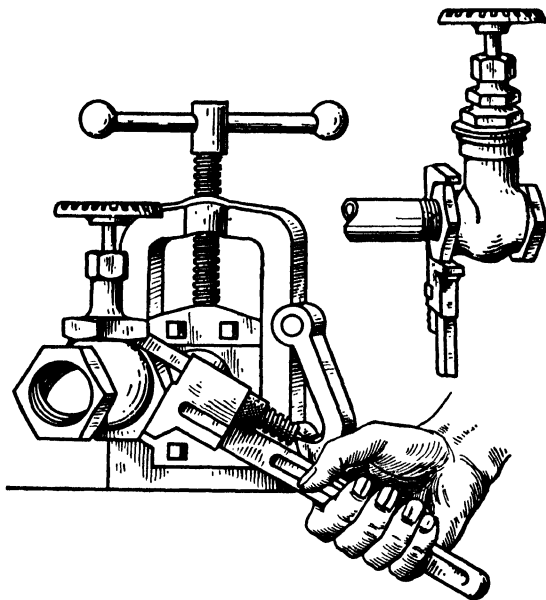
Apply the wrench to the pipe side of the valve to prevent twisting the body. (Courtesy of Power.)
